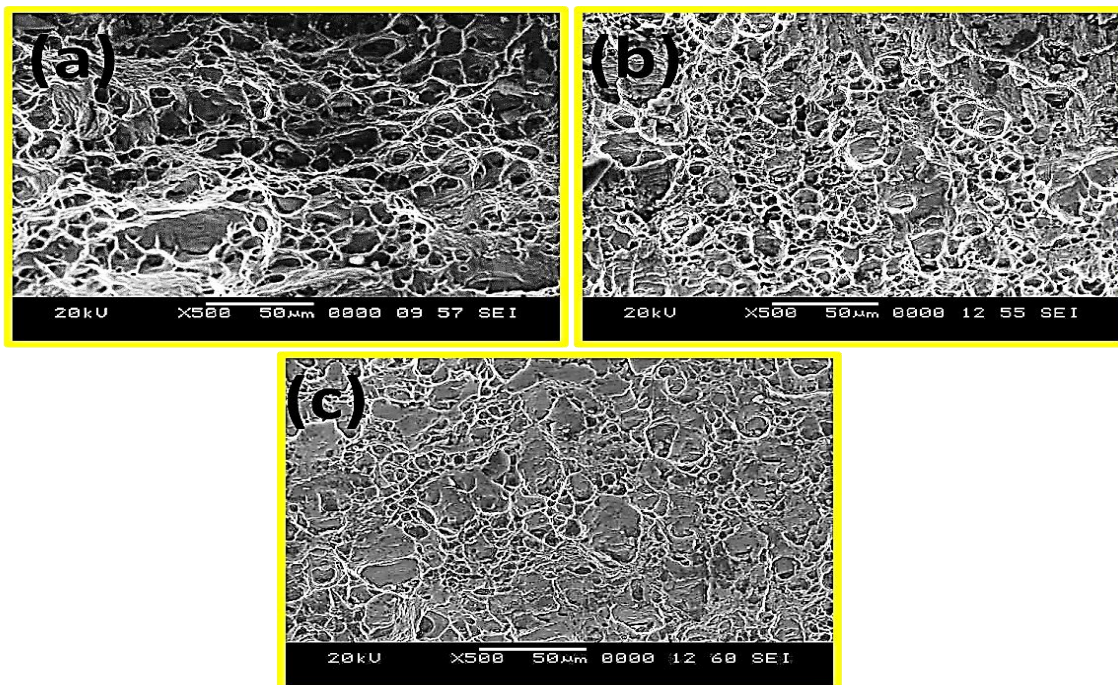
Fracture surface of the interface regions of CMT welded A5754-H111 and A5083-H111 joint using ER5356 filler wire: (a) A5754 side and (b) A5083 side and (c) over-all weld joint
